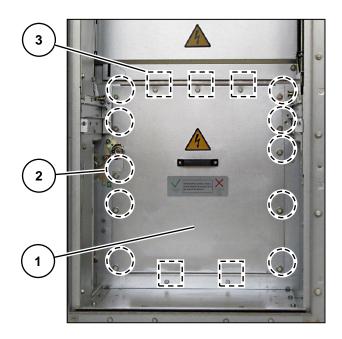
All panel versions except for contactor panels with panel width 435 mm: 15 bolted joints on partition
